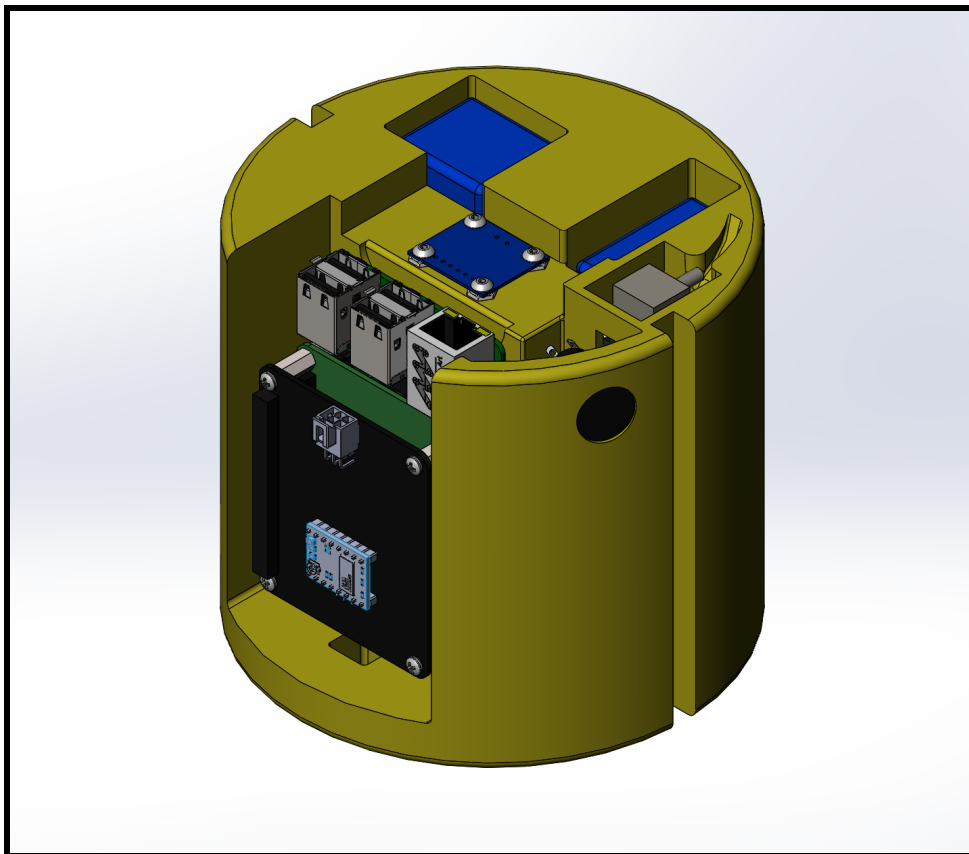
ATS Section Avionics Assembly Isometric View
